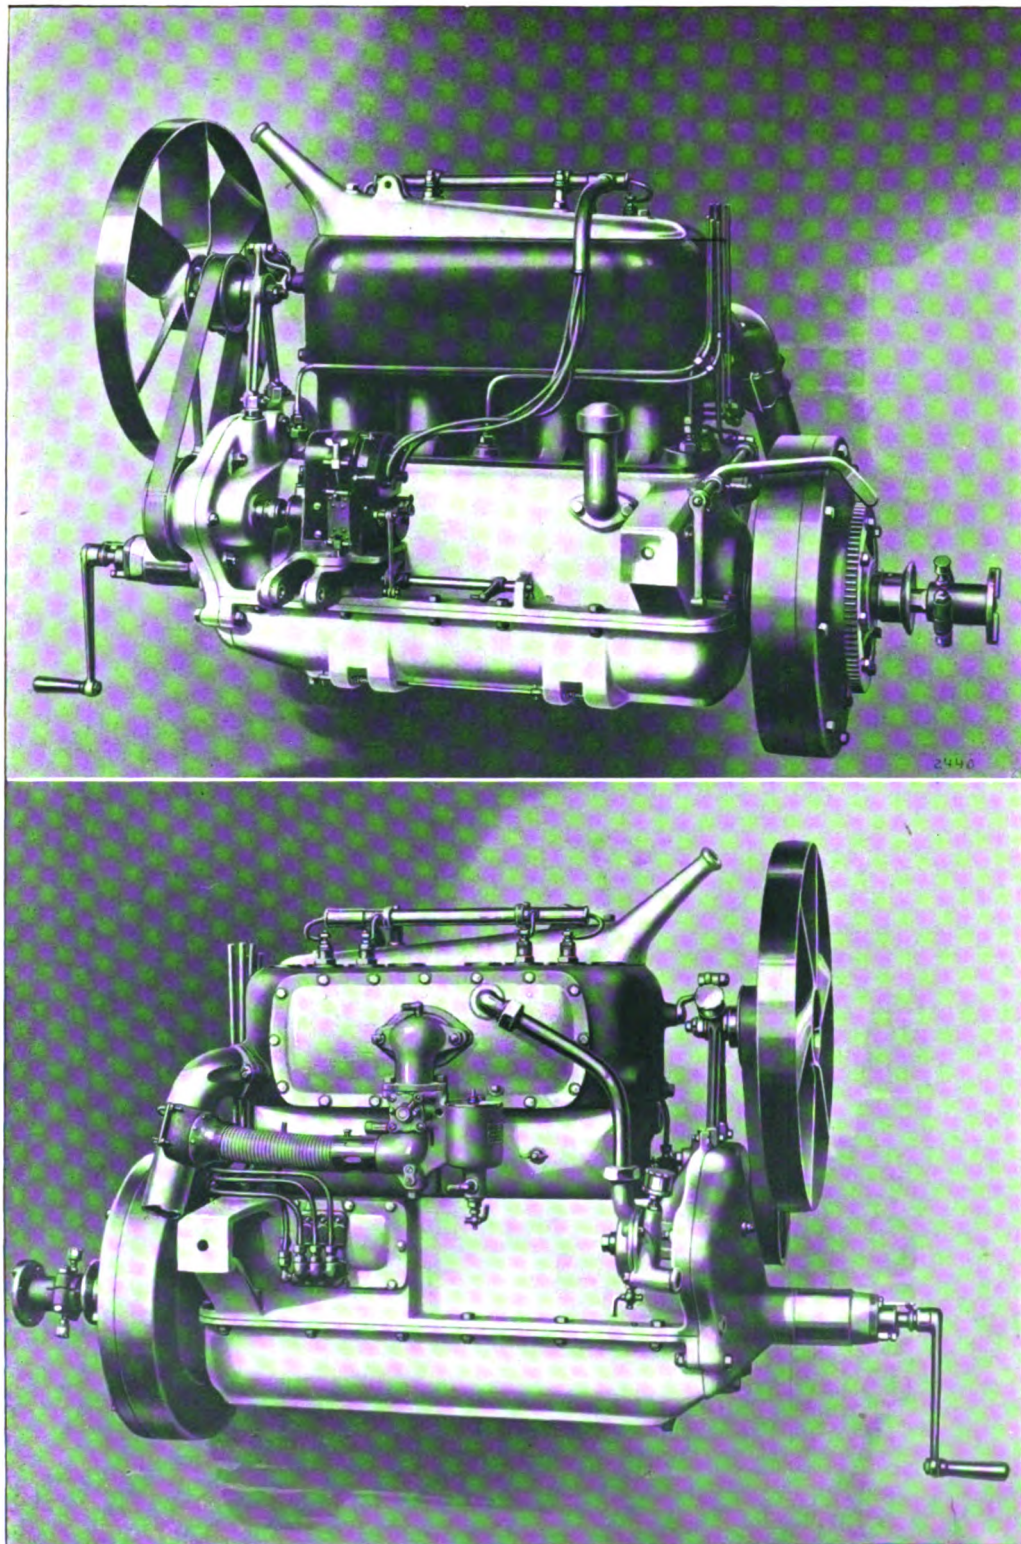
Typical 1917 4-cylinder Motor Car Engine, with Electric Starter and provision for heating the carburetor. Left and right side views. Omitted: Radiator and its connection to waterpipe at top and to centrifugal pump below (to the right)
